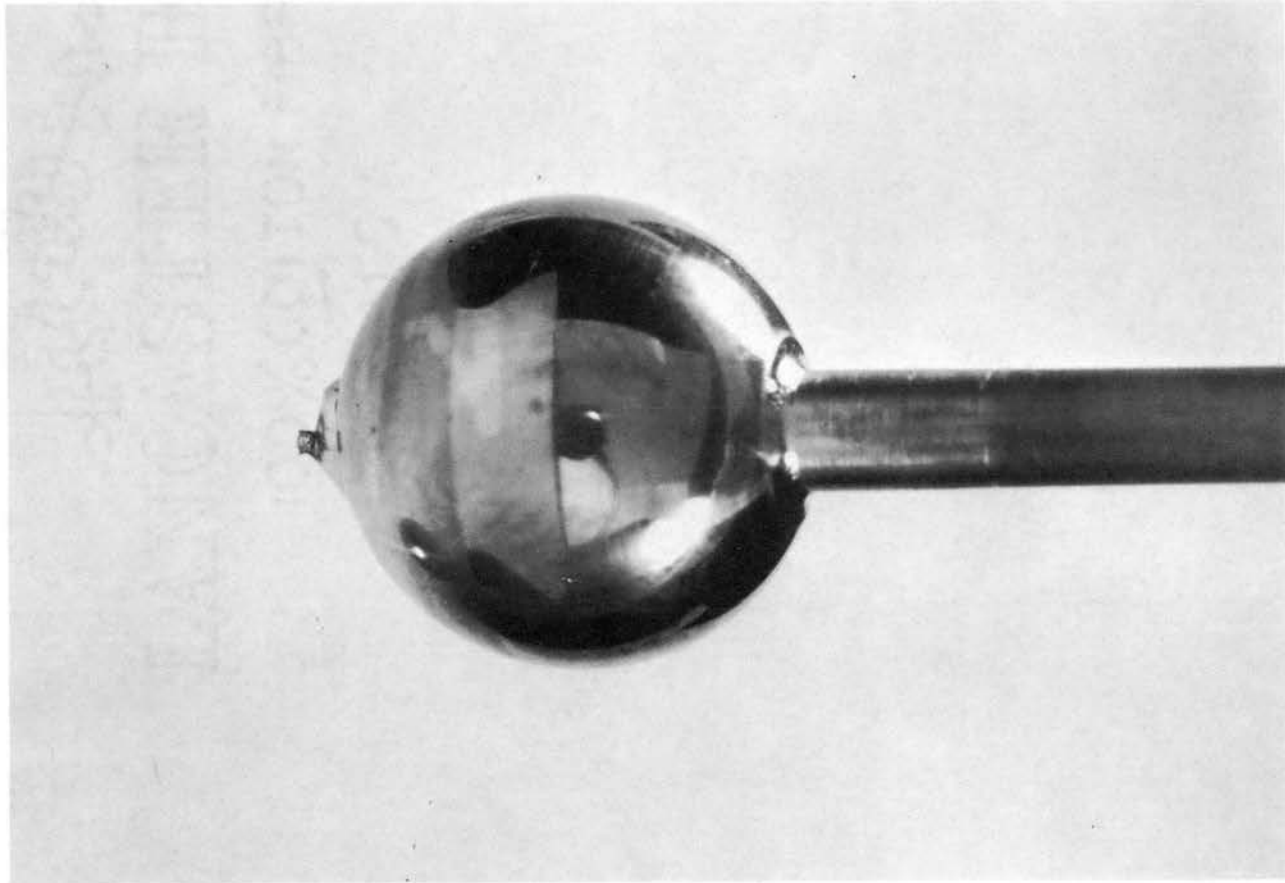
Sphere-Thermocouple Assembly - After Welding.
